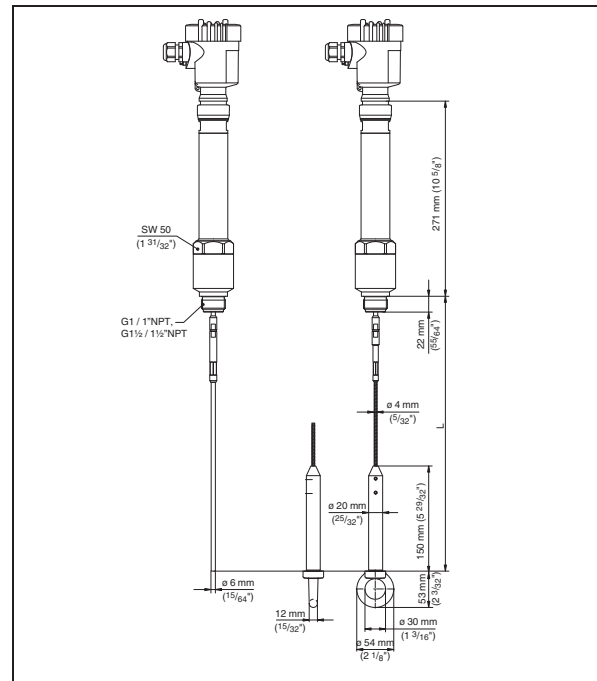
VEGAFLEX - cable, rod version with thread (-110 ... +400 °C/-166 ... +752 °F)
